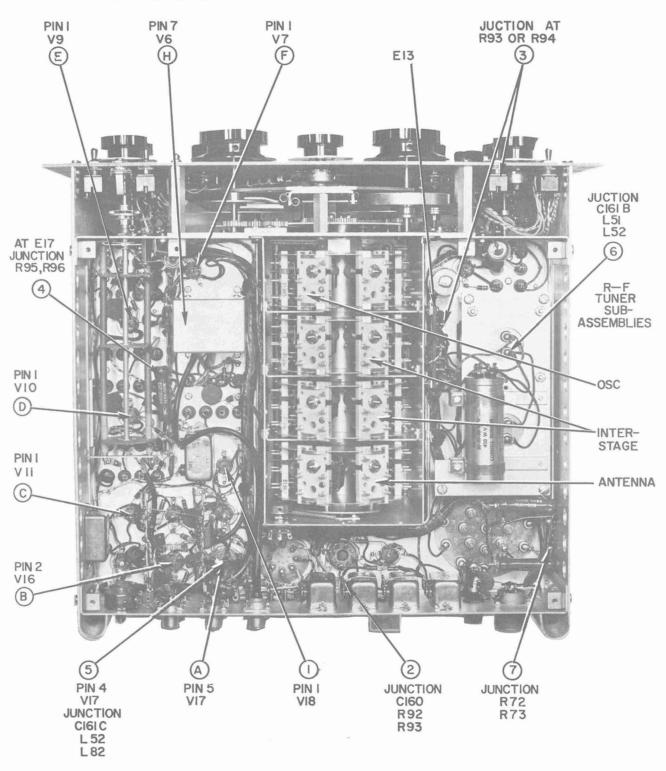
Radio Receiver, Parts Identification for Locating Test Points
